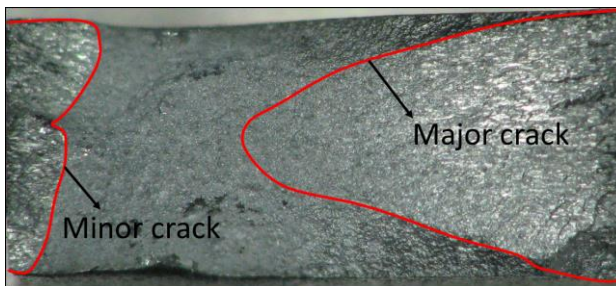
Fracture surface of the specimen illustrating that the dominant crack starts from the contact zone at the right side
